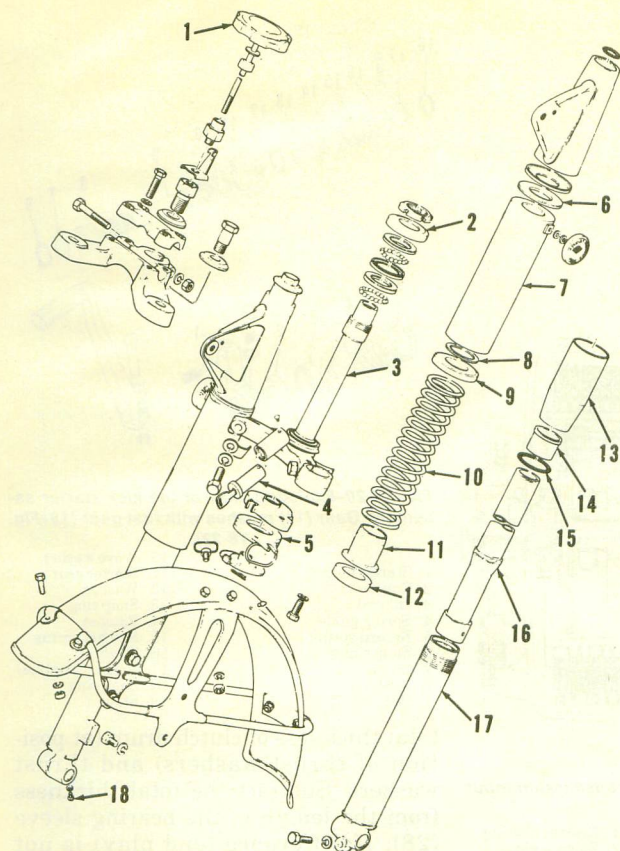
Exploded view of R3 steering and front suspension assembly.
